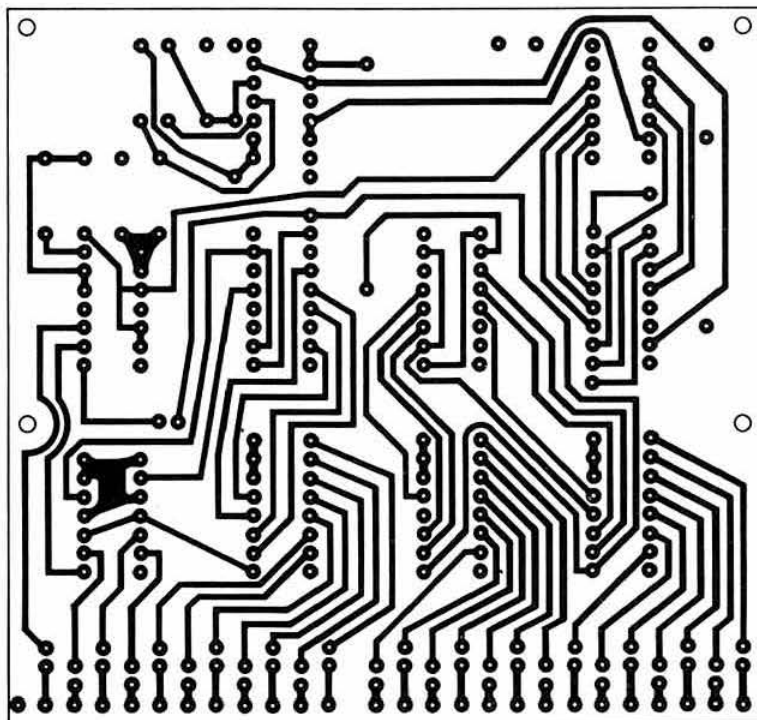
The display pcb, back view. The input leads are soldered directly to the copper side of the board
